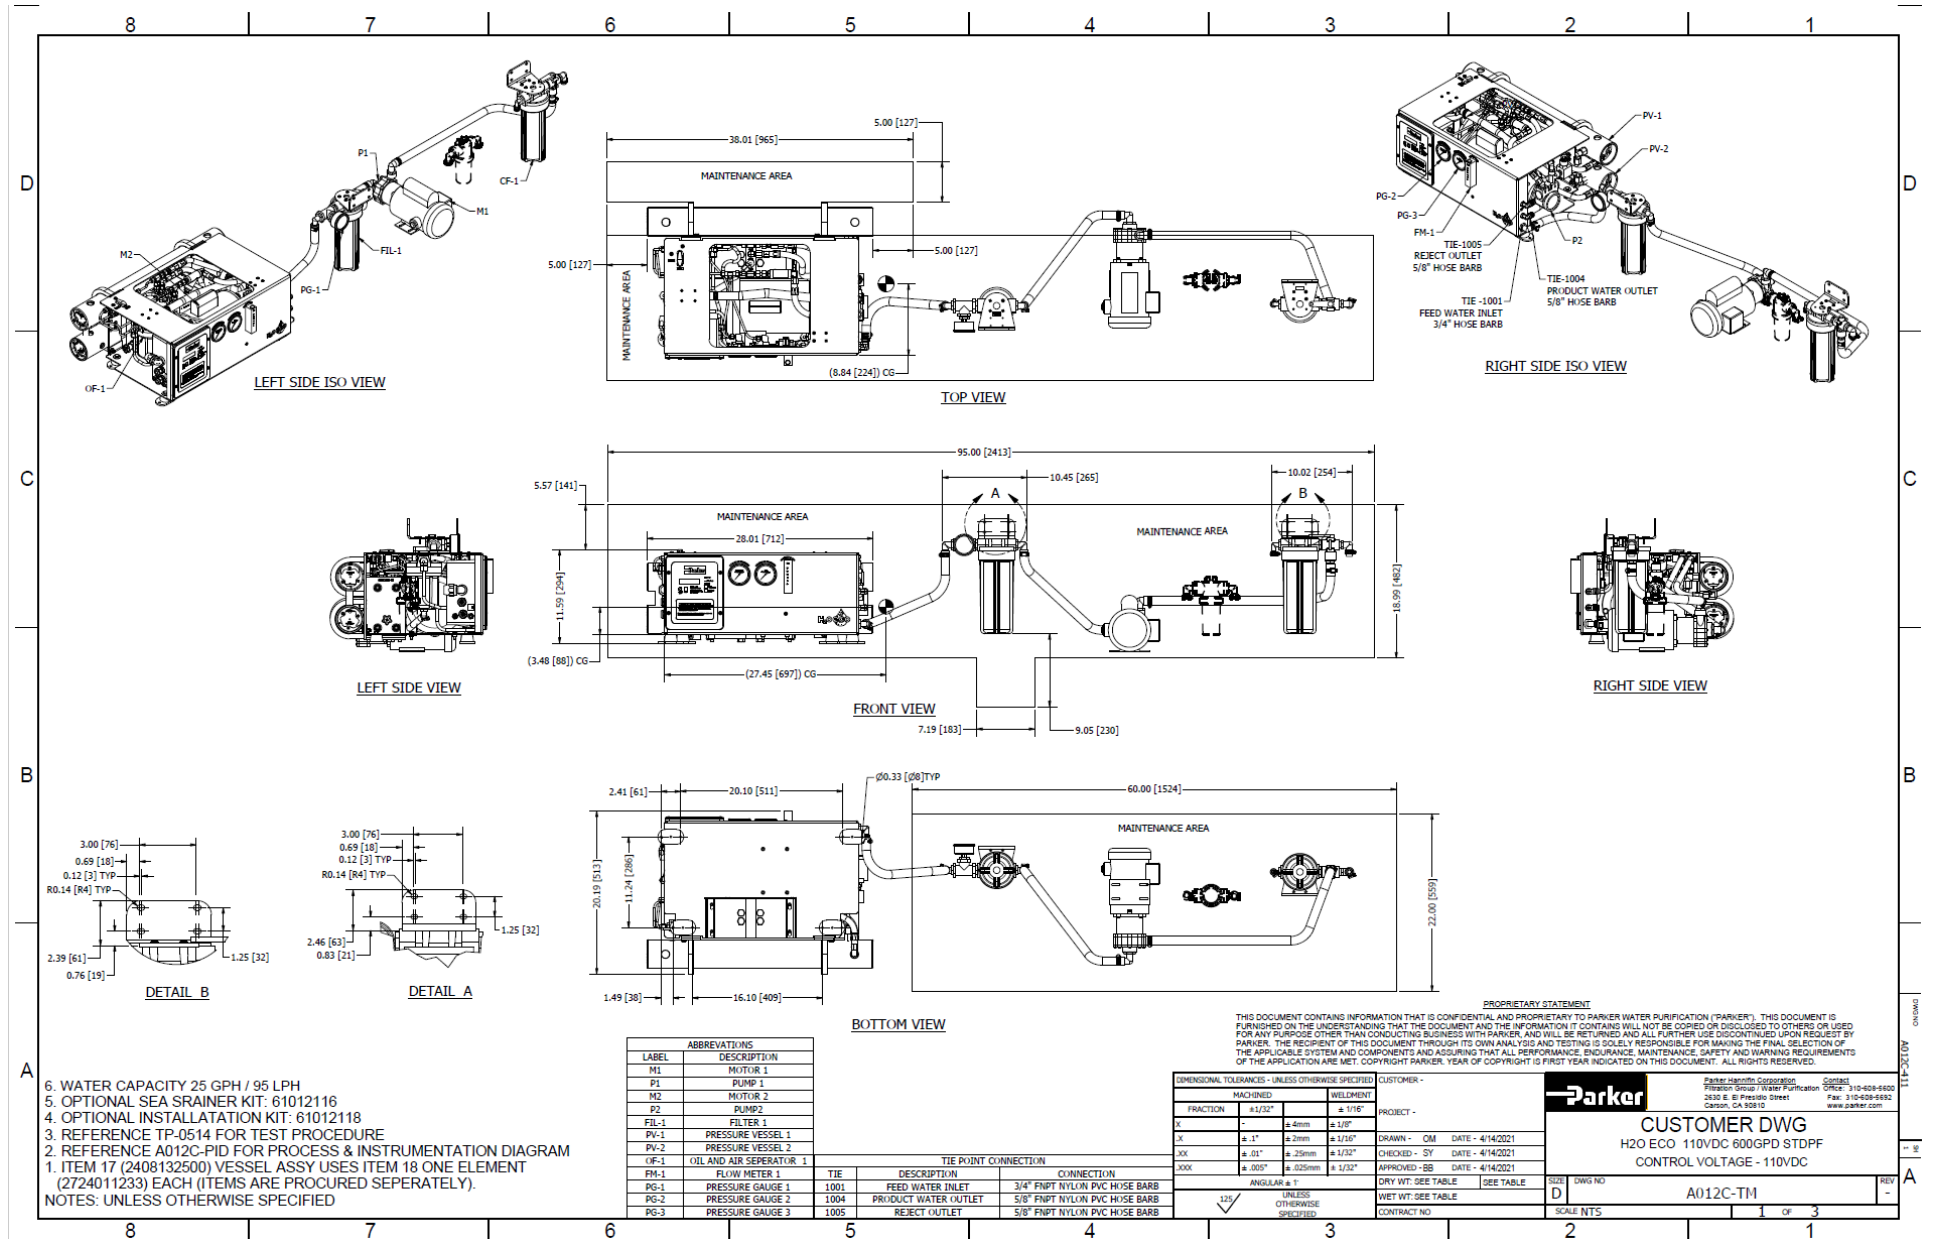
GENERAL ARRANGEMENT DRAWING
